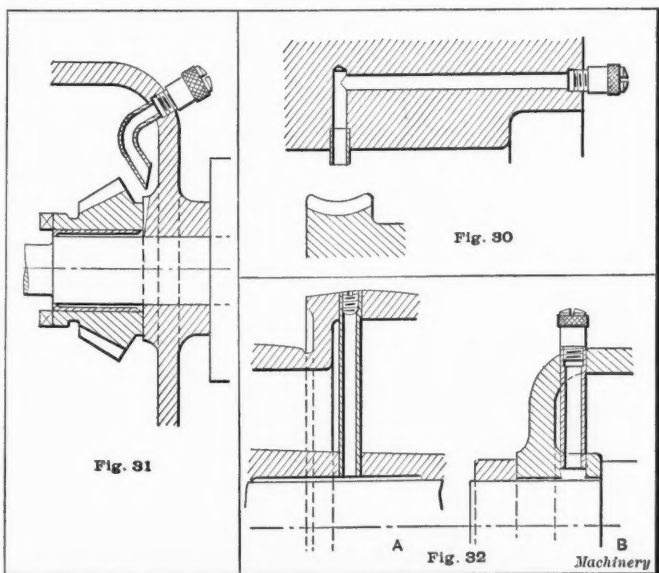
Holes and Directing Pipe to prevent Waste. Fig. 31. Directing Pipe inside Gear-box. Fig. 32. Pipes employed to span Gaps
